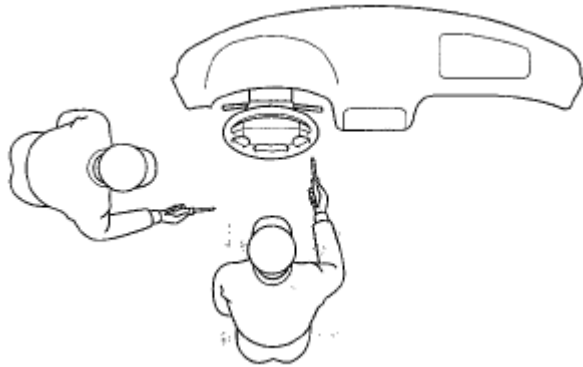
Precaution - Do Not Position Yourself In Front Of Airbag Assembly During Removal
